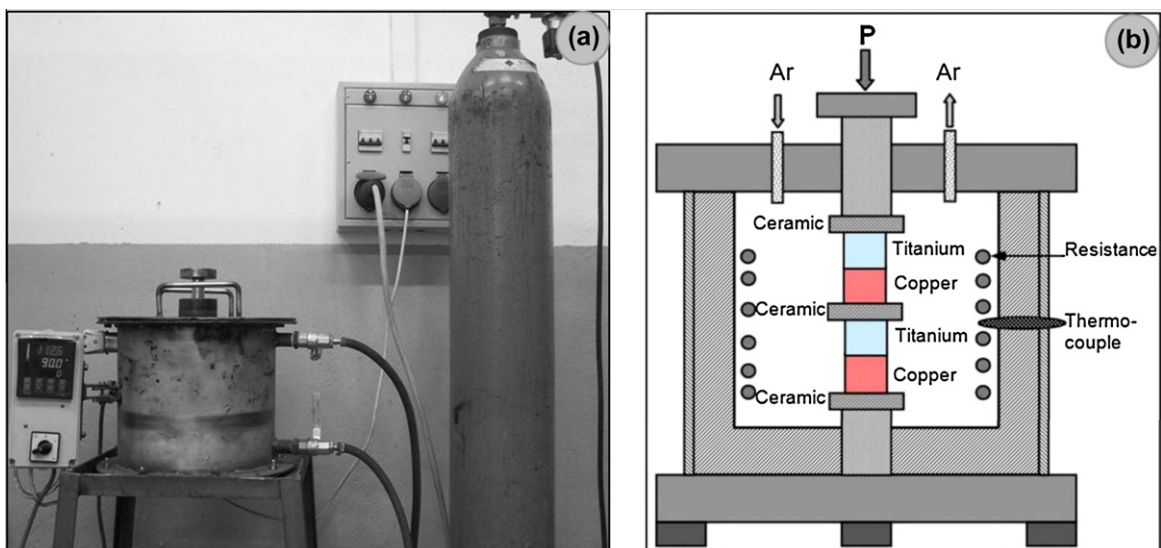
Illustration of diffusion welding equipment (a) photo and (b) schematic.
